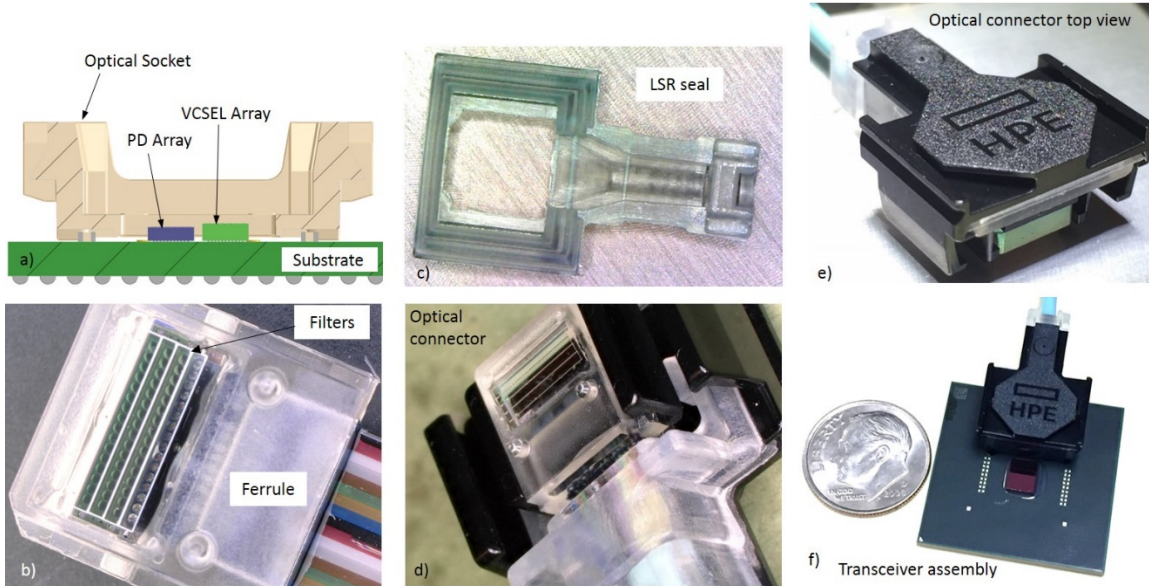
CWDM Tx/Rx module components a) electro-optical active on build-up substrate with optical socket; b) CWDM MUX/DEMUX assembly; c) seal; d) optical connector, filter-side view; e) optical connector cover-side view; f) transceiver assembly.
